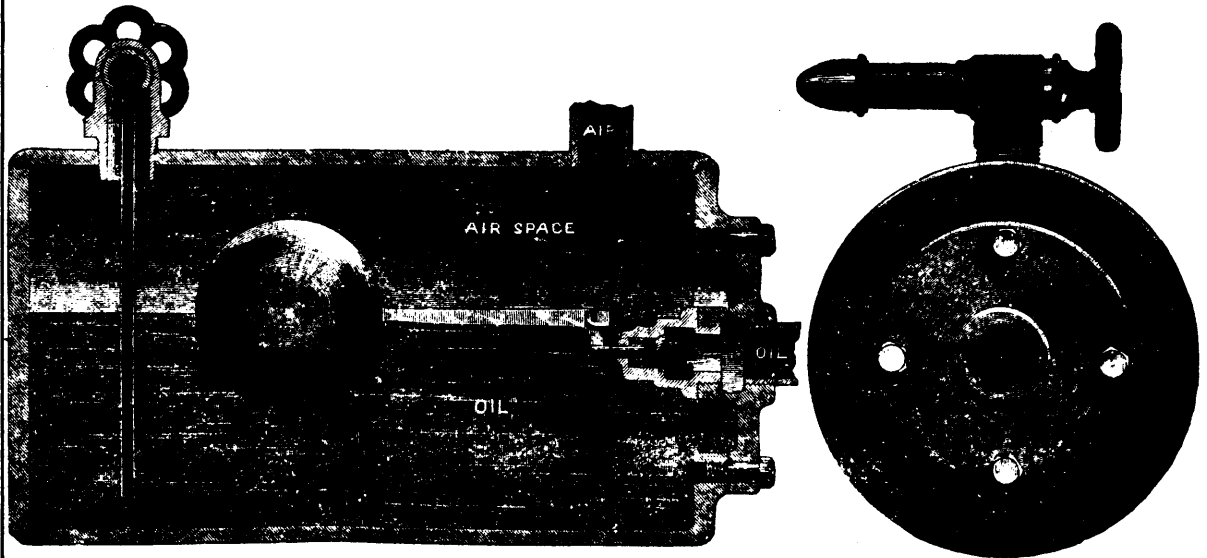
INTERIOR AND END VIEW OF BURNER CYLINDER.
